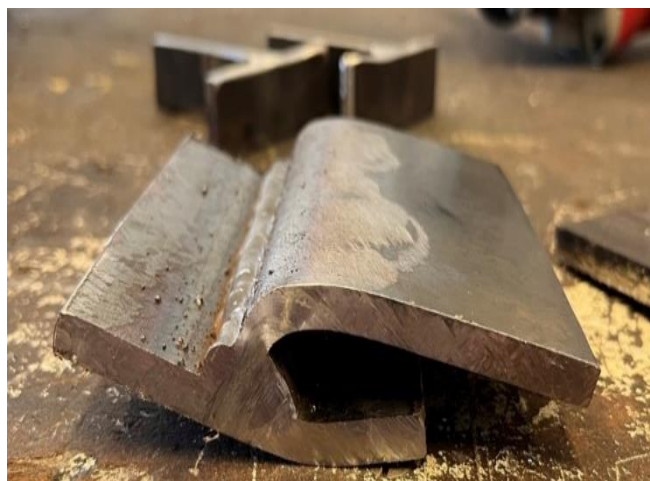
Double fillet welded tee-joint as an indicator piece for the fillet weld bending experiment.
